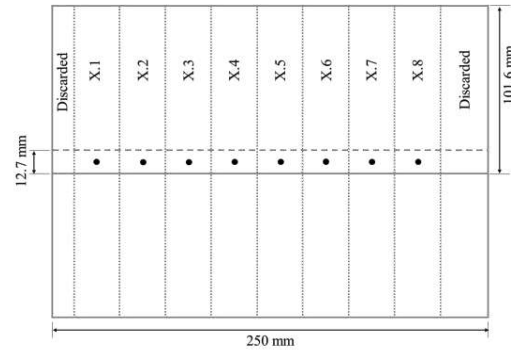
Sample dimension and cutting plan of the coupons used for welding. The black dots mark the point of measurement for the weld line thickness
